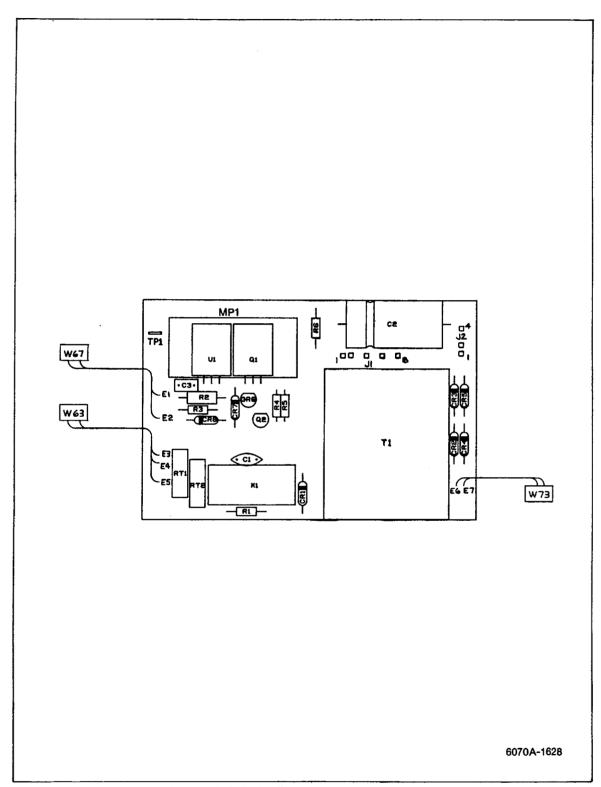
A5A3 Auxiliary Transformer PCB Assembly
